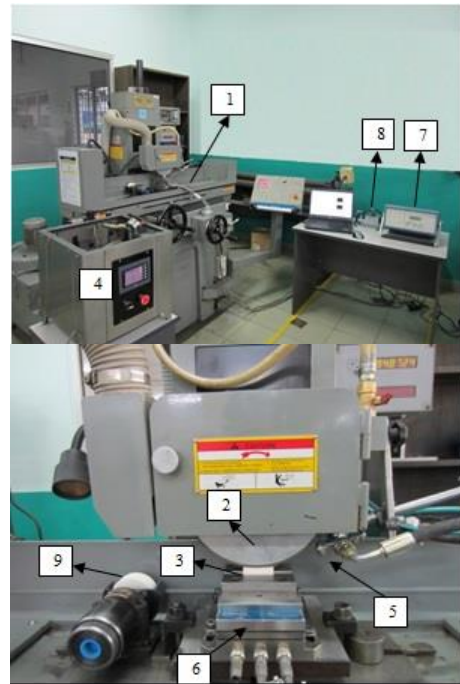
Experimental setup (1-grinding machine, 2- grinding wheel, 3- workpiece, 4-MQL system, 5-Nozzle, 6-Dynamometer, 7-Amplifier, 8-DAQ system, 9- Truing device)
